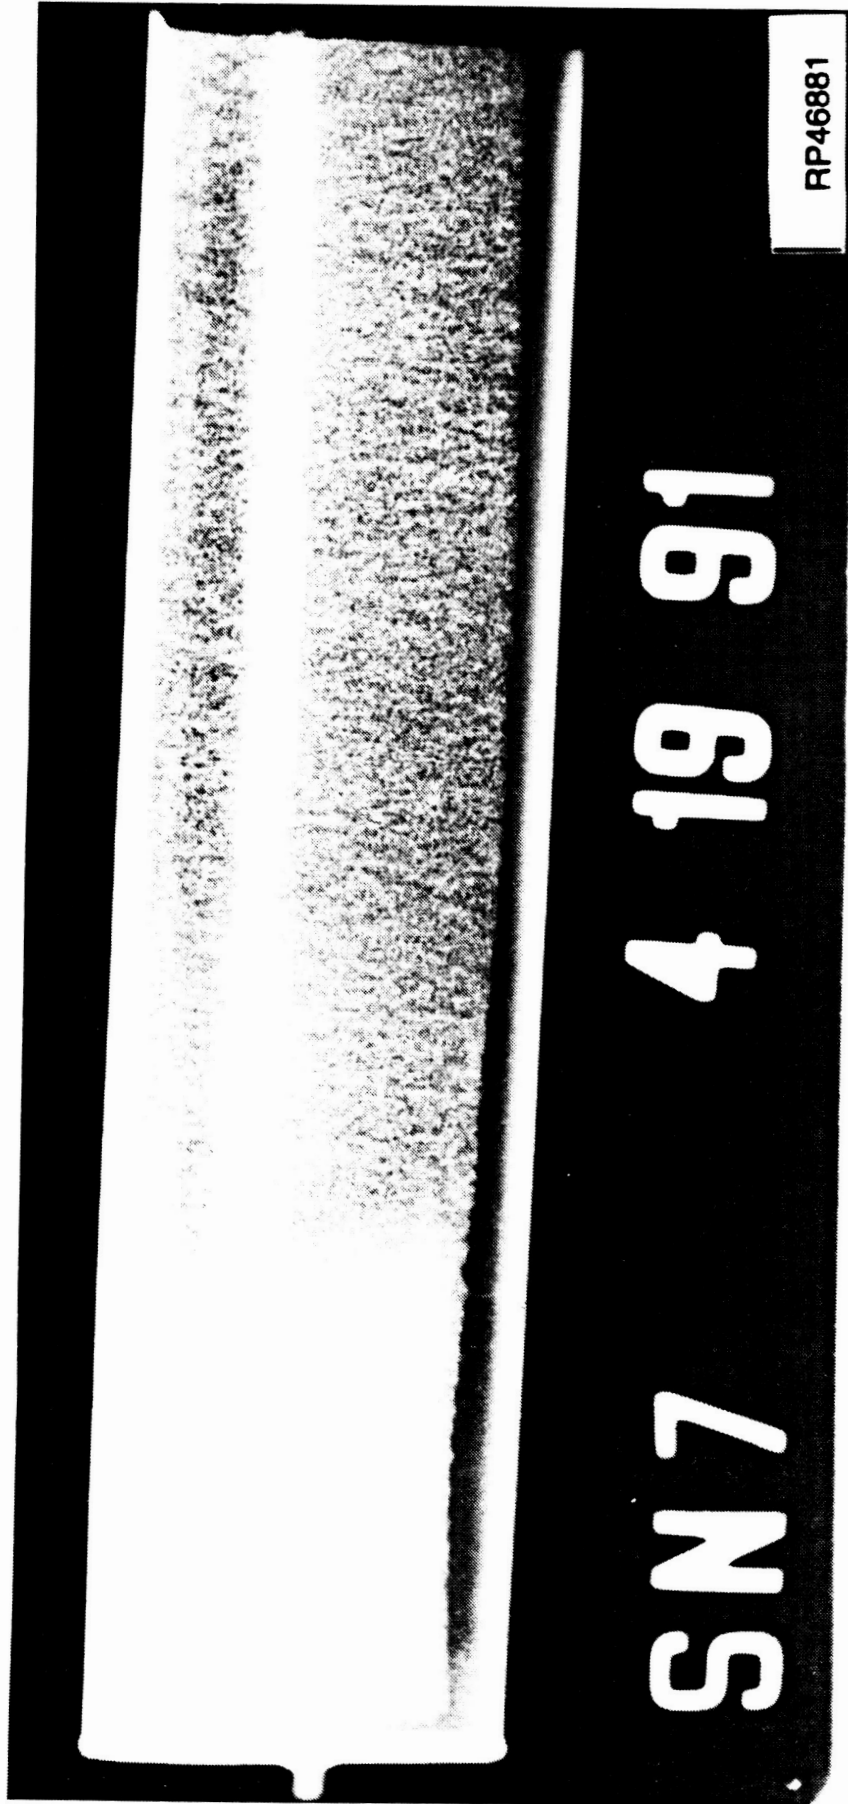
X-RAY OF SIDE VIEW OF WICKING TEST CANISTER
